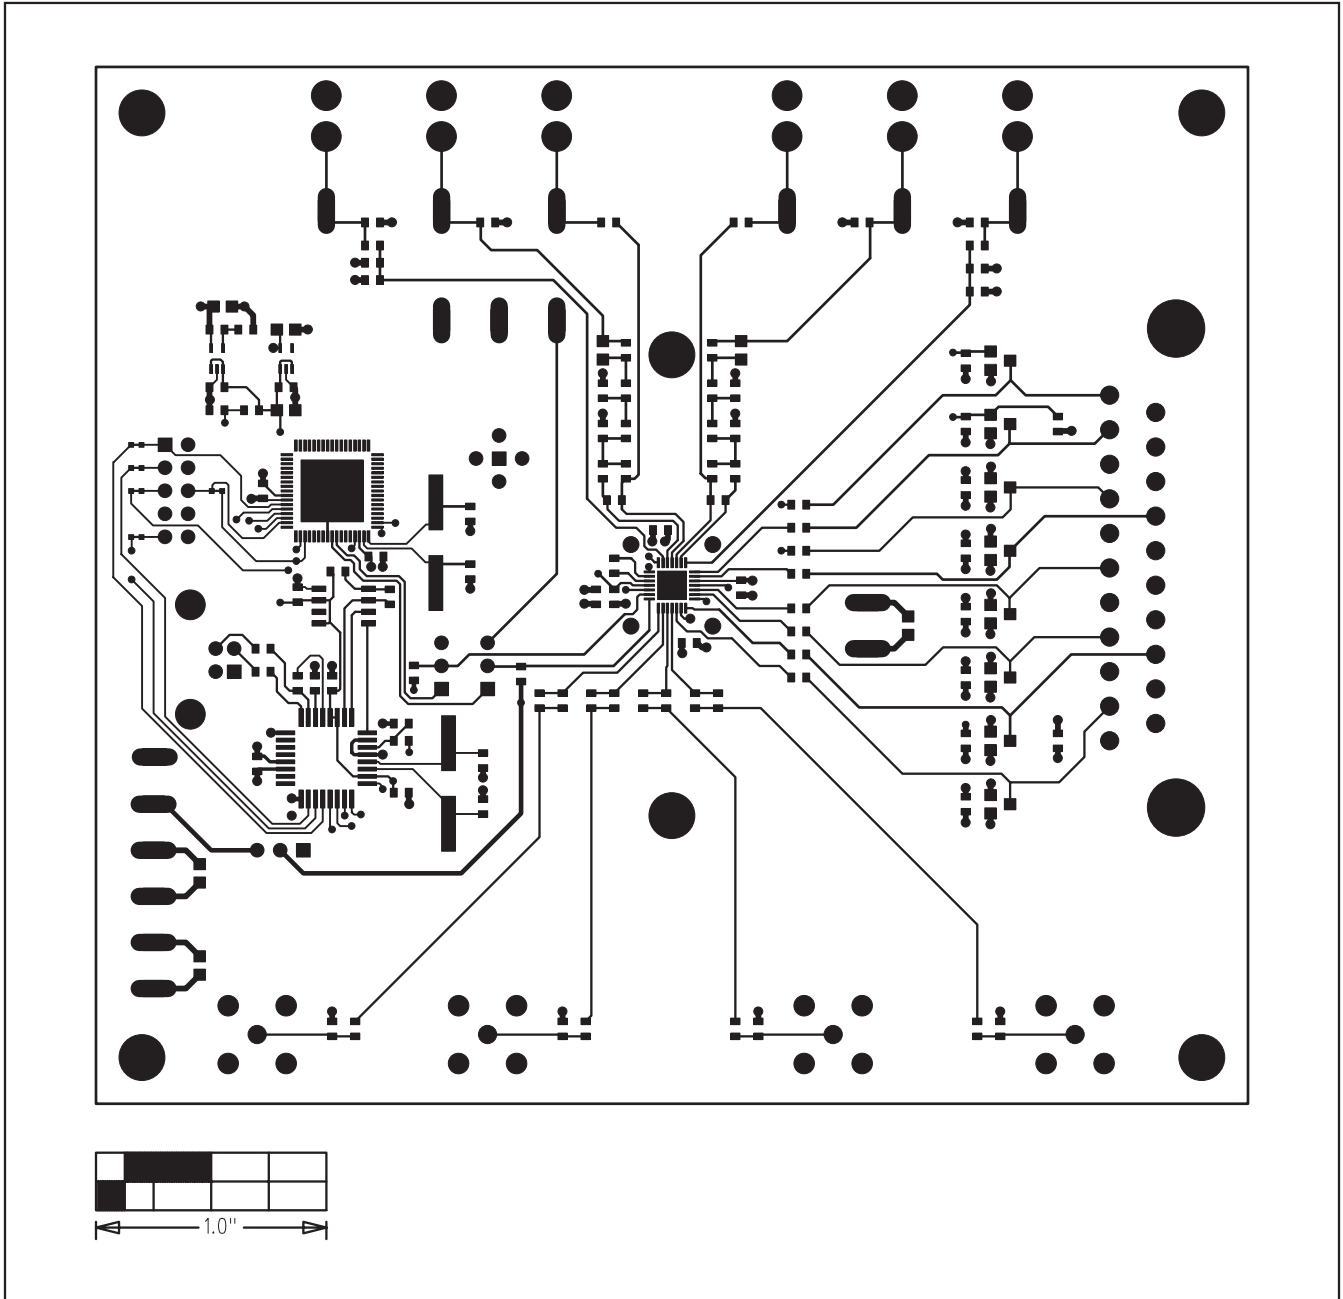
MAX9597 EV Kit Component PCB Layout—Component Side
